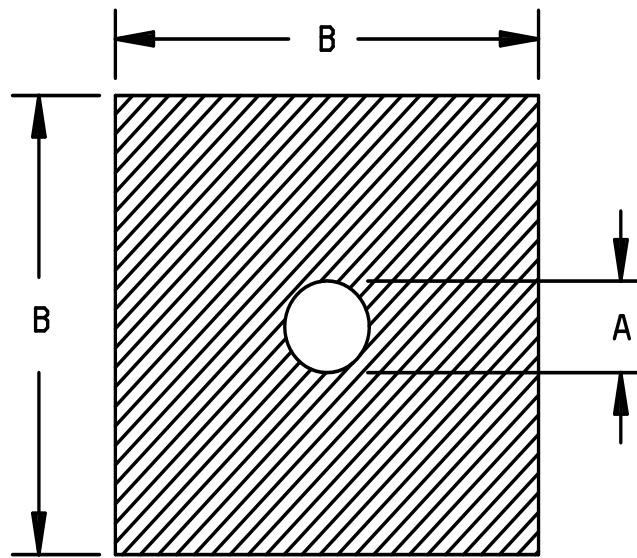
Physical dimensions, surface mount (2 pin UB versions).
